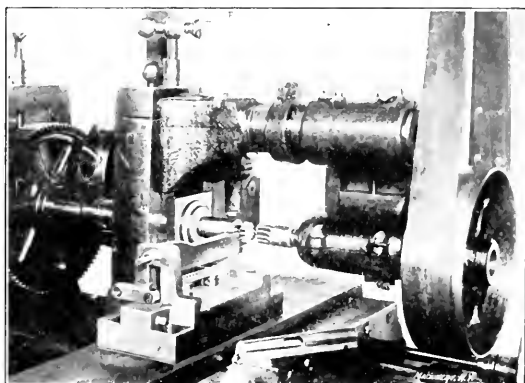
Double Spindle Attachment taking Cuts on Slide.
